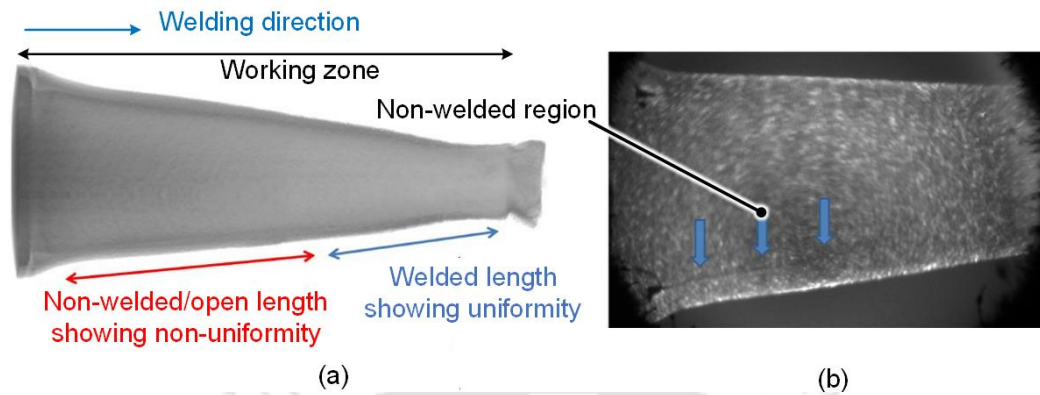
(a) X-ray tomography of one of the samples and (b) high-resolution optical image indicating uniformity in the welded region
